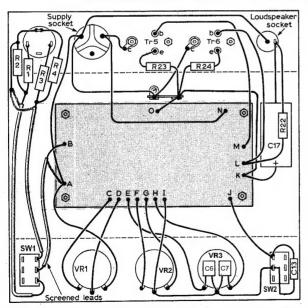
The wiring between the component board and those components mounted directly on the chassis.
